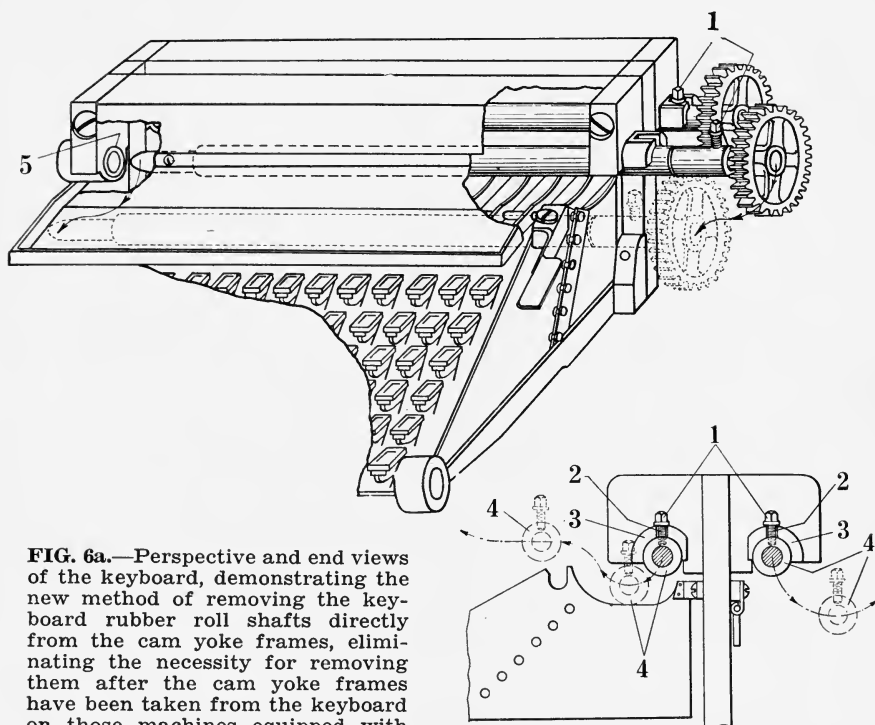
Perspective and end views of the keyboard, demonstrating the new method of removing the keyboard rubber roll shafts directly from the cam yoke frames, eliminating the necessity for removing them after the cam yoke frames have been taken from the keyboard on those machines equipped with the side magazine unit.
